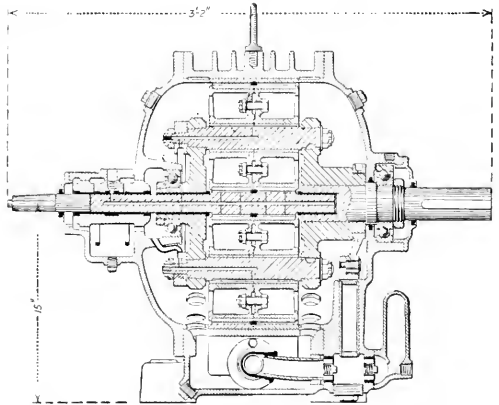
SECTION THROUGH THE TURBO-REDUCTION GEAR
